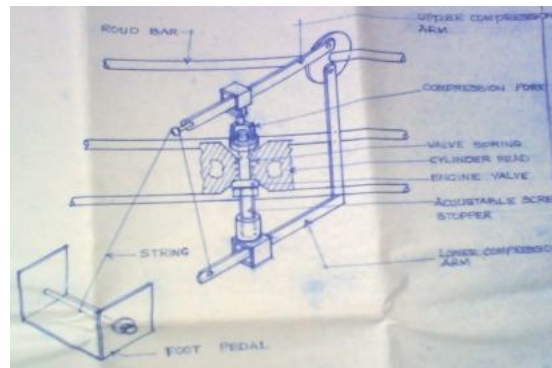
(a) Operational sectional View of Internal Combustion Engine Valve Installation Machine.
